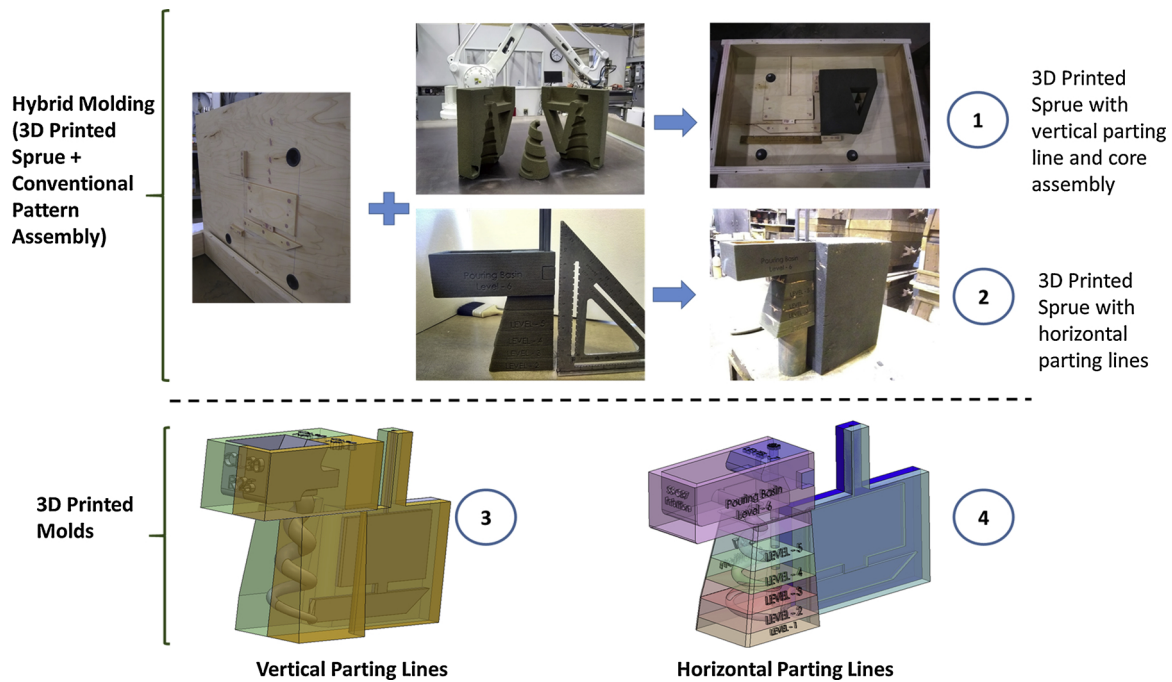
Multiple techniques to fabricate CHSC (1) Hybrid molding with vertical split sprue and core assembly, and (2) Hybrid molding with horizontal parting lines; and 3D Printed molds with (3) vertical and (4) horizontal parting lines.
